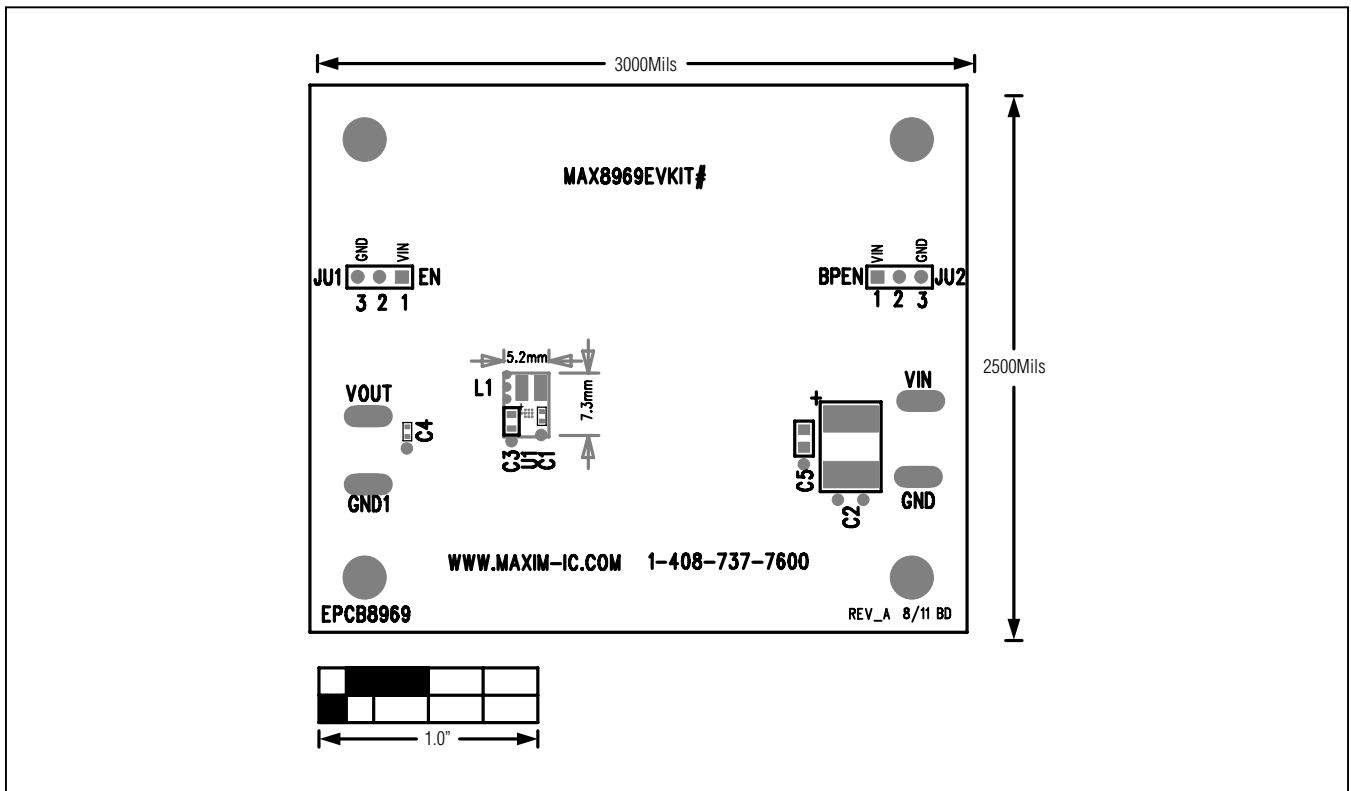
MAX8969 EV Kit Component Placement Guide—Component Side
